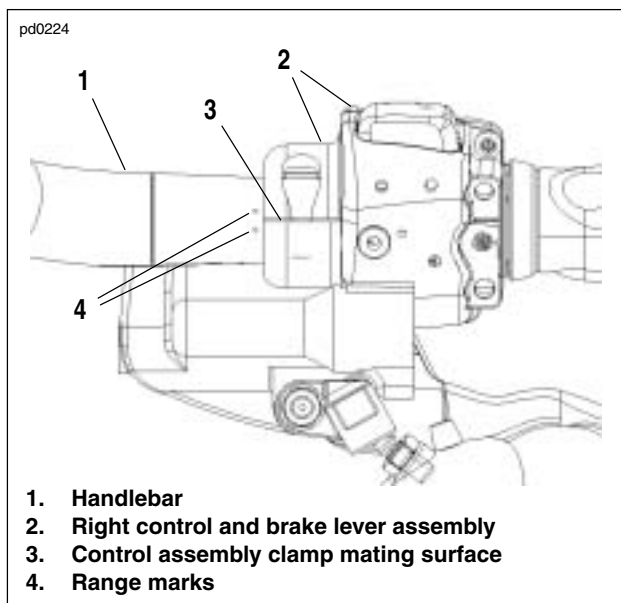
Handlebar Control Assembly (Bottom View, Right Side Shown)
